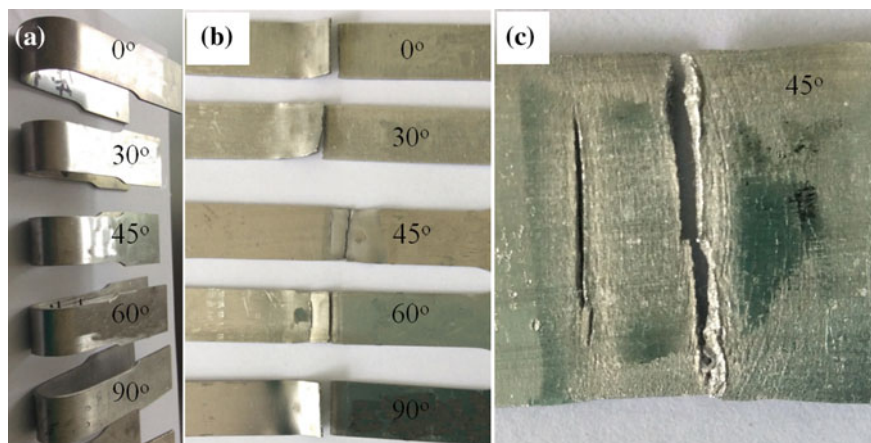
Cold bending and multiple bending morphologies of aluminum clad steel plates. a Cold bending samples; b multiple bending fracture morphologies; c The microscopic fracture characteristics of multiple bending sample along the angle of 45°
